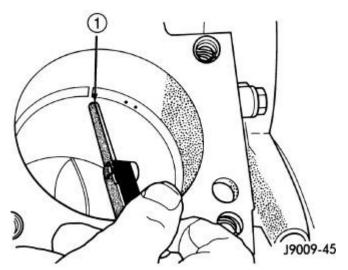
RING END GAP MEASUREMENT Courtesy of CHRYSLER LLC
